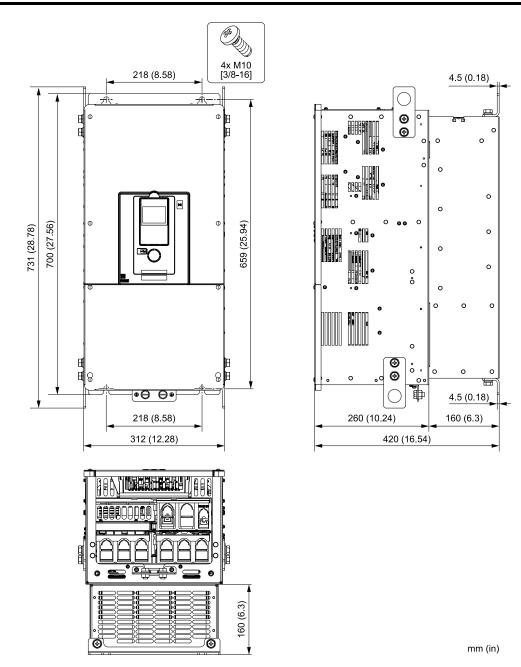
Exterior and Mounting Dimensions Diagram 1
